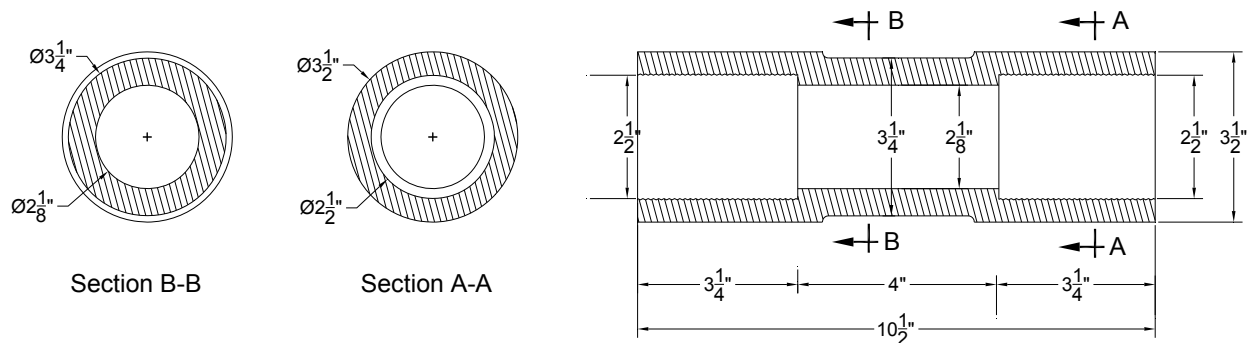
Longitudinal and cross sections of the fabricated vertical struts
